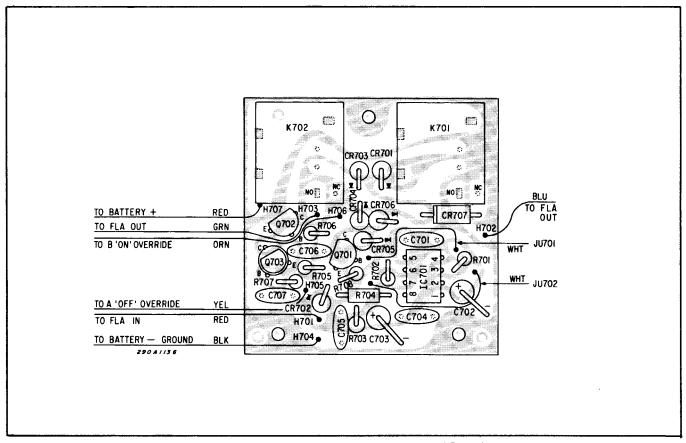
Control Module Optional Flasher Circuit Board Parts Location Diagram.
